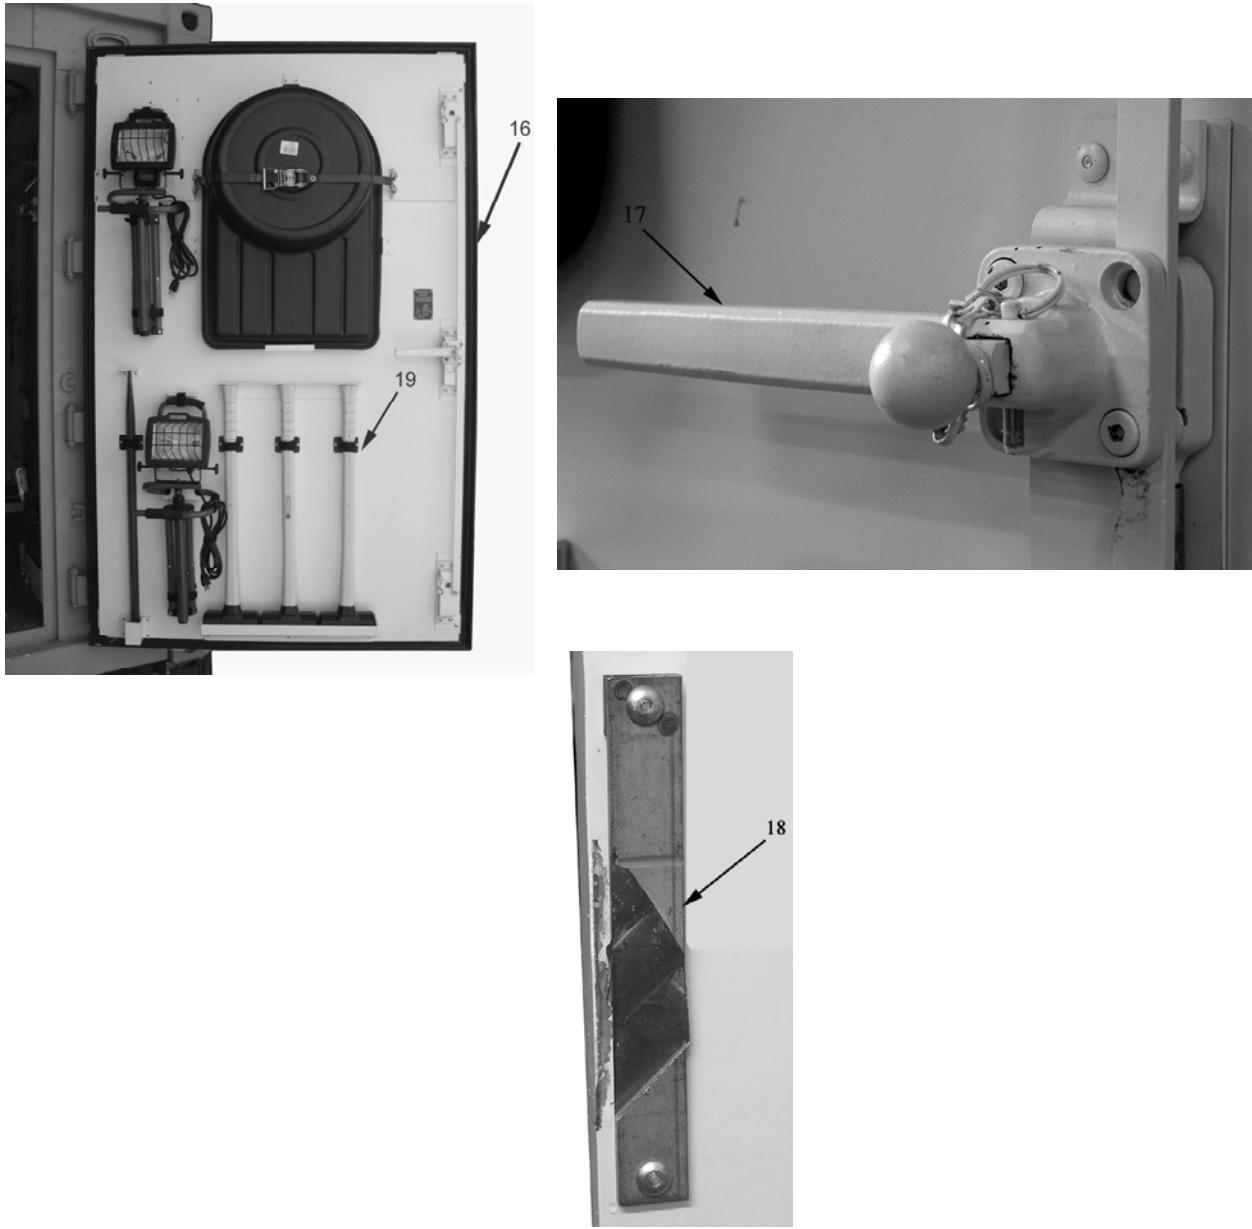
Group 0201, Outside Personnel End Wall (Sheet 2 of 3)
